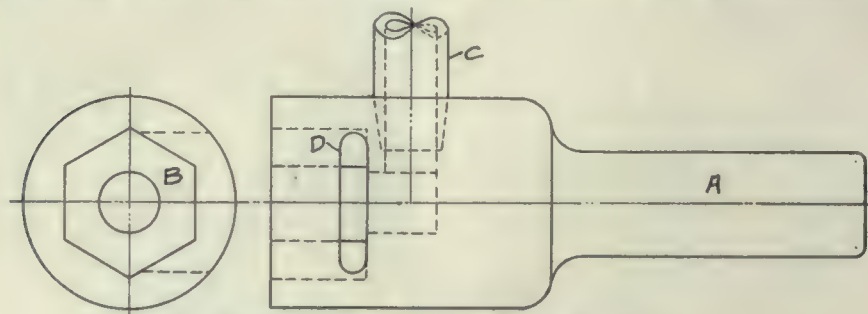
Self-cleaning Nut Holder for Turret Lathe.
